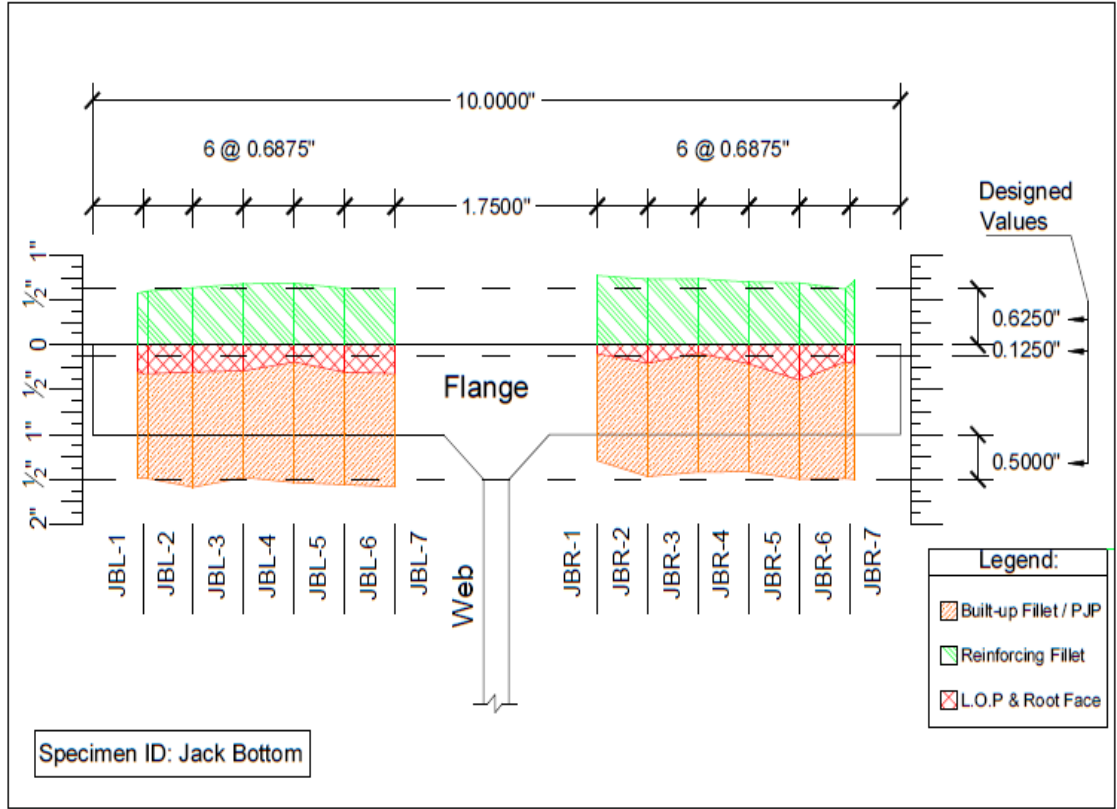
JB- Cross Sectional Weld Penetration View
